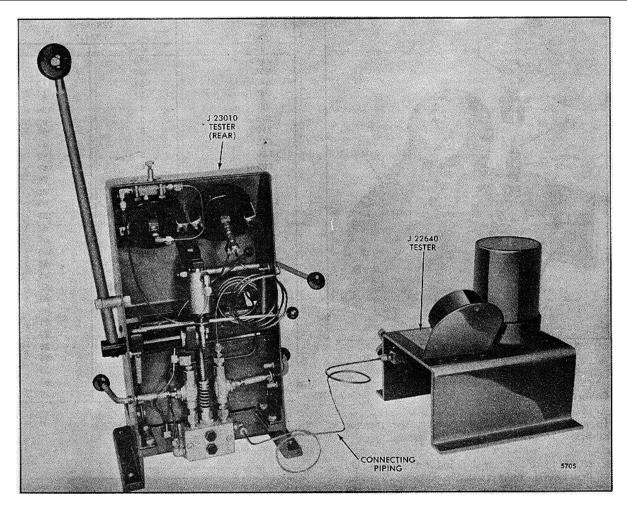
Injector Needle Valve Tester J 23010 with Auxiliary Tester J 22640
